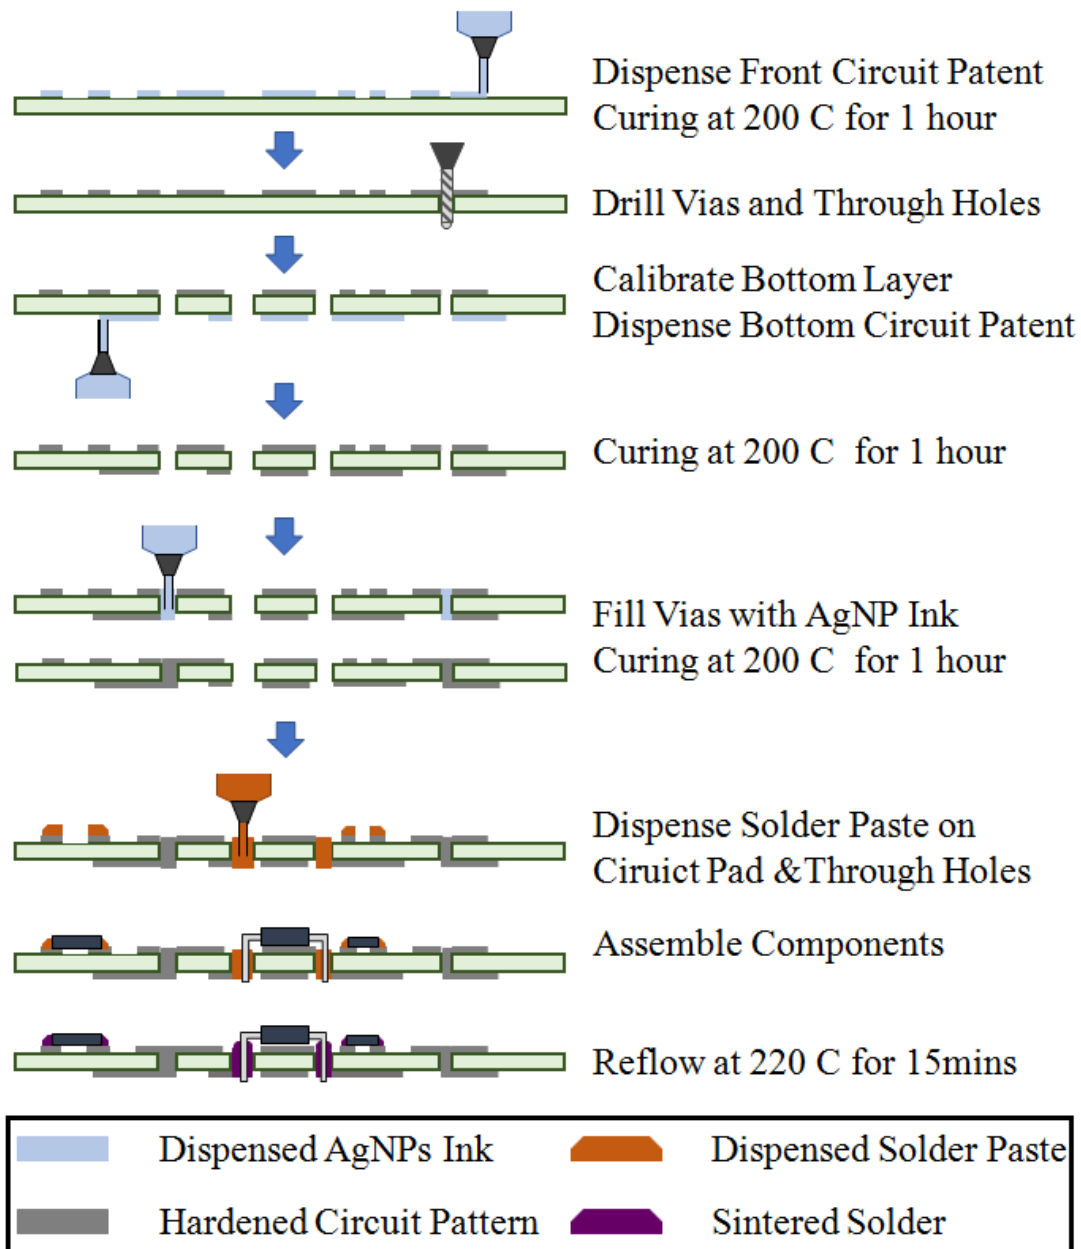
Flow chart of the additive manufacturing of 3D printed PCB
